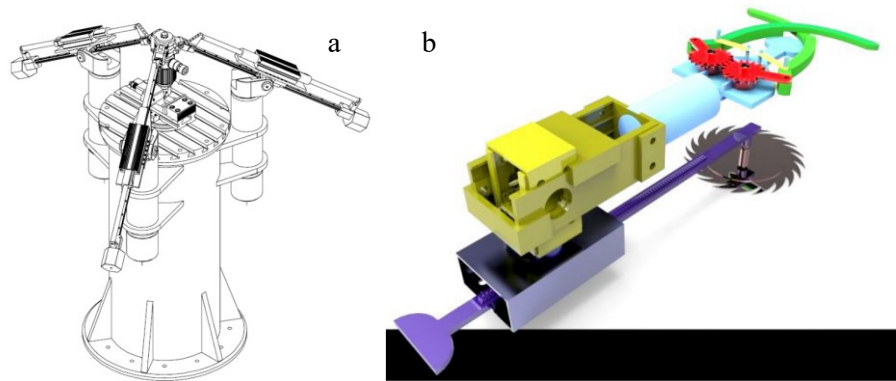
(a) 3-RRPRR Manipulator For Milling [56] (b) Farmer Robot Arm and Cutter [57]
